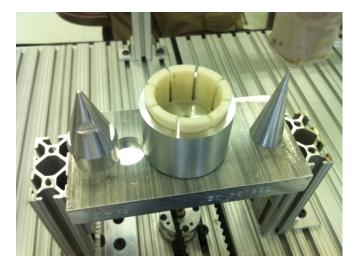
Collet Assembly Station (L to R: groove ring cone, pneumatic rotating collet, nose ring cone)
